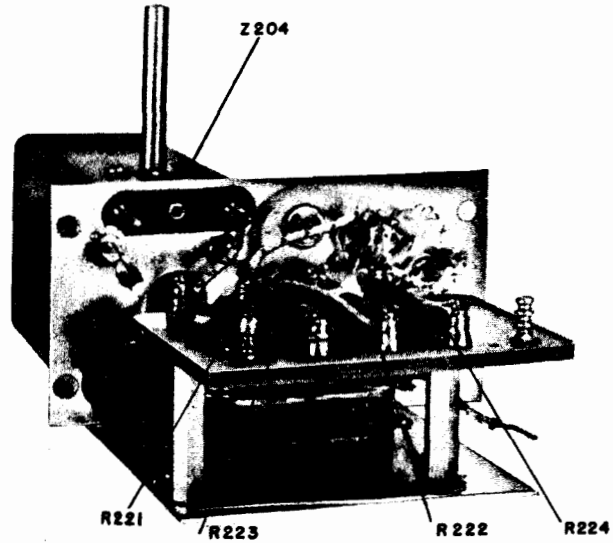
Receiver B-F-O Assembly, Bottom View
